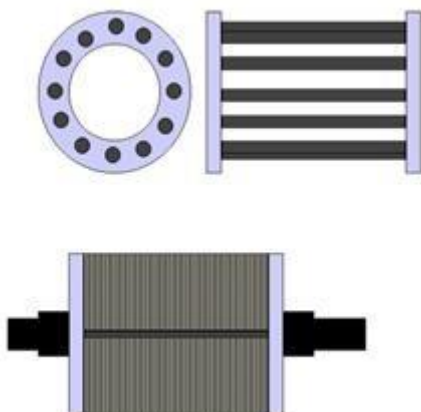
Schematic of a simple squirrel cage rotor [54]
